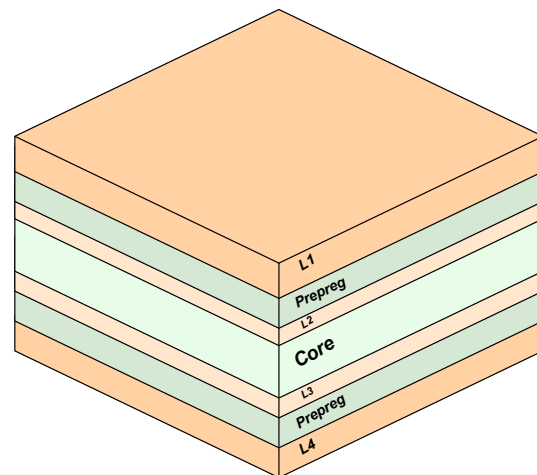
The JLC04161H-7628 (Standard) stackup offered by JLCPCB implemented in the PCB design.
